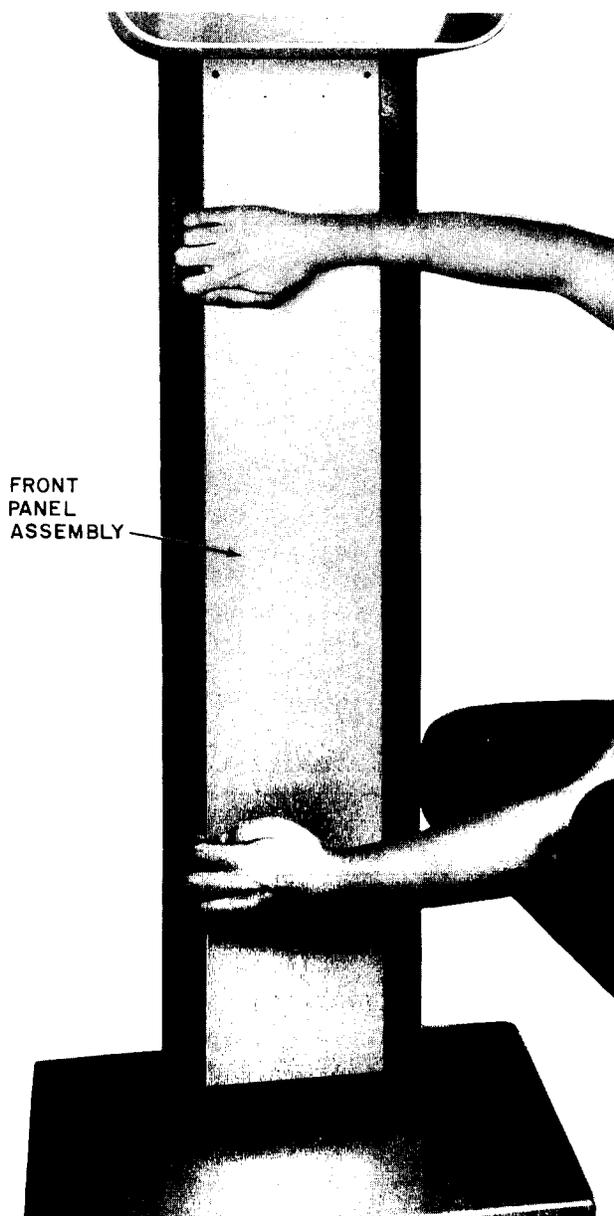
Installing or Removing Front Panel Assembly on Post or Post-Base
